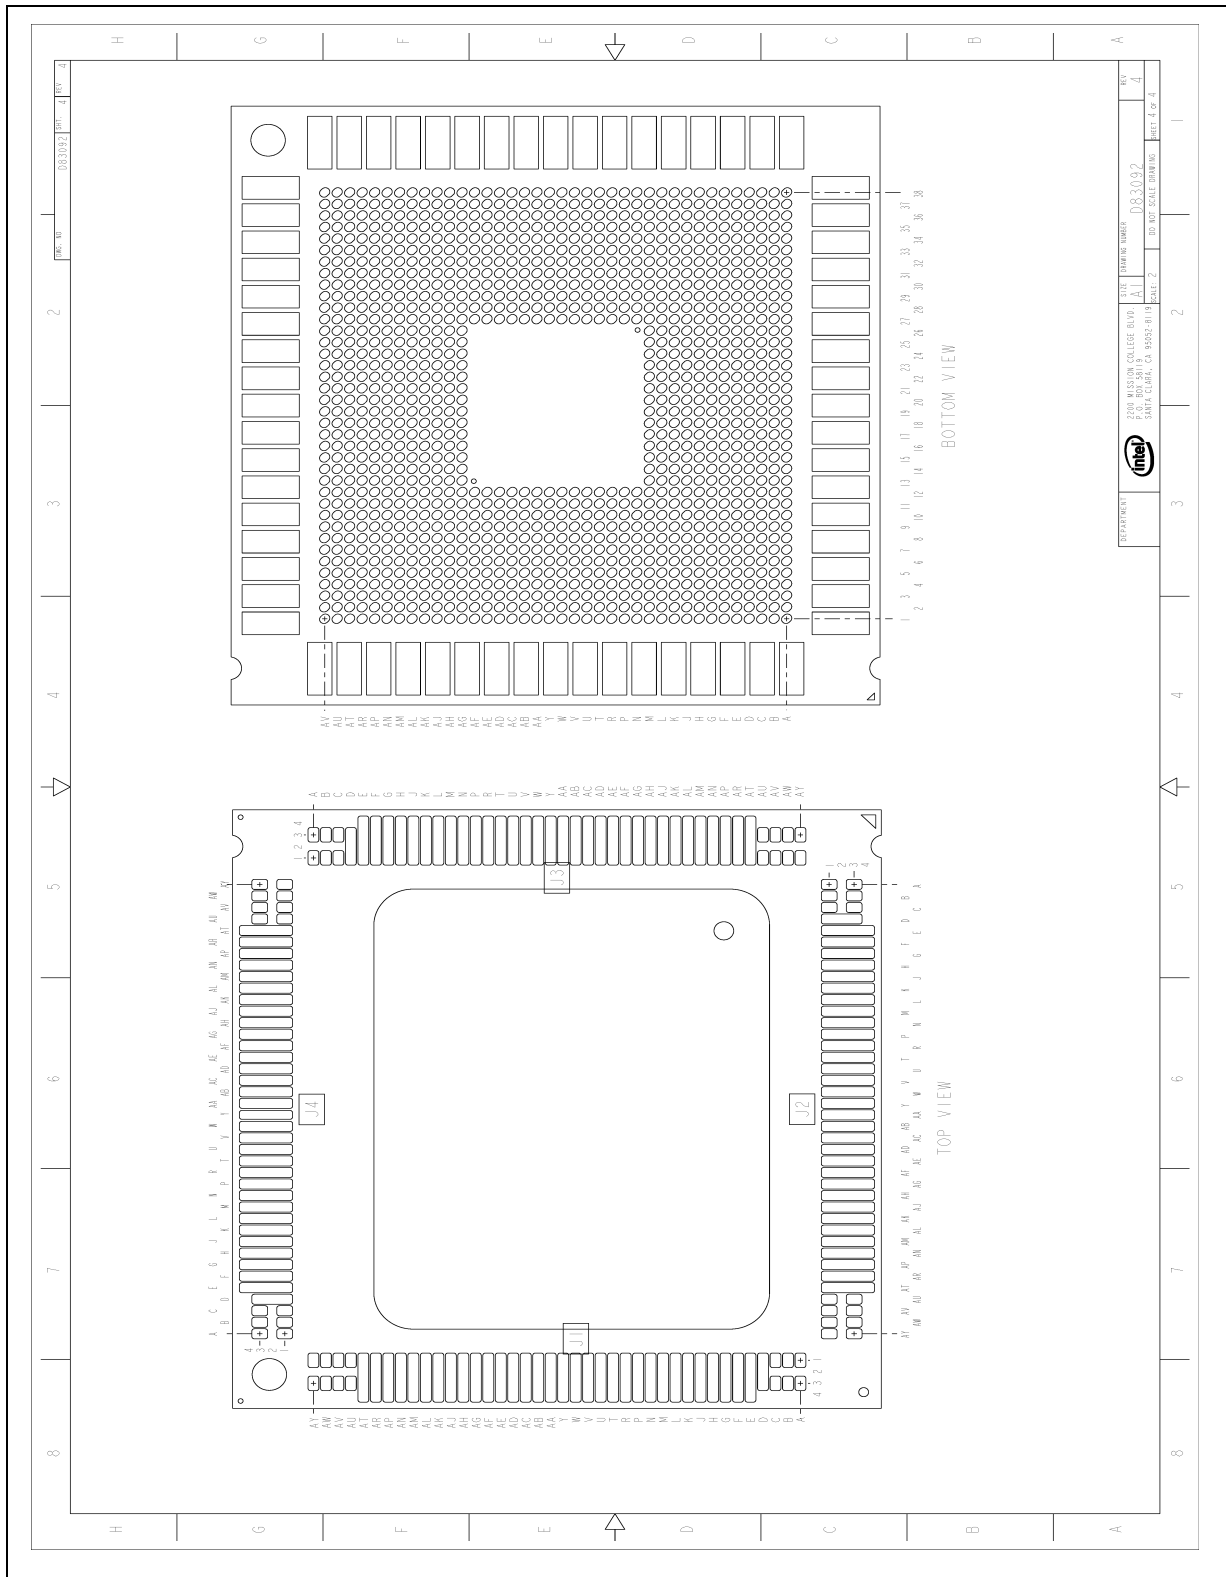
Intel® Itanium® Processor 9500 Series Package Drawing (Sheet 1 of 4)
